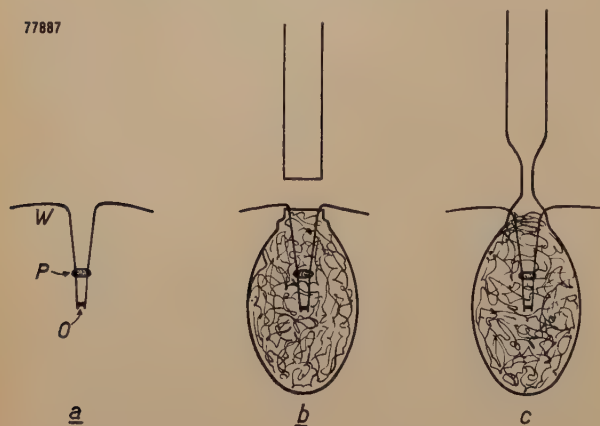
Manufacture of the new "Photoflux" bulbs, with a "bead mount". The bead mount (a) simply consists of the two lead-in wires W carrying the filament O , fused into a glass bead P . This mount is suspended in the bulb (b), which has been blown from thin glass tubing. By fusing to this a piece of the same glass tubing (c), the lead-in wires are sealed-in, and the bulb is provided with an exhaust tube (which itself, after sealing off, provides the material for blowing the next bulb).
